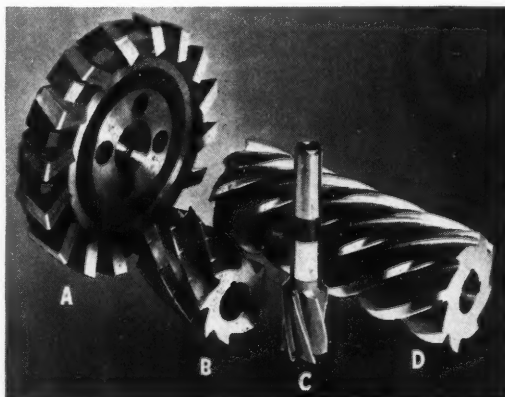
Illustration Showing Cutters Designed for Milling Aluminum
